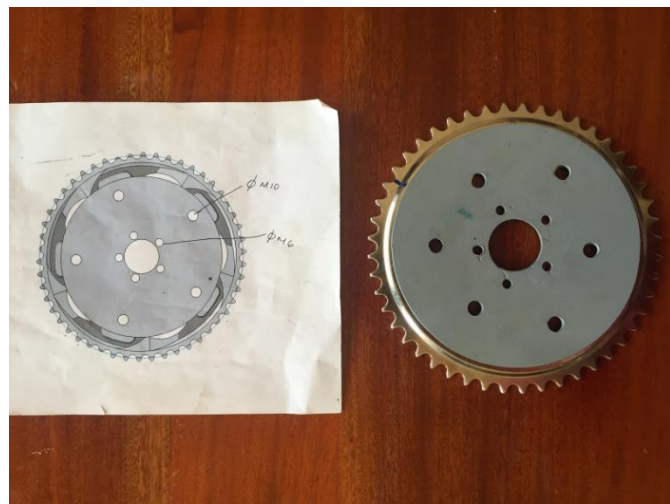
Side by side of drawing and part produced by machinist in Blantyre [7]
